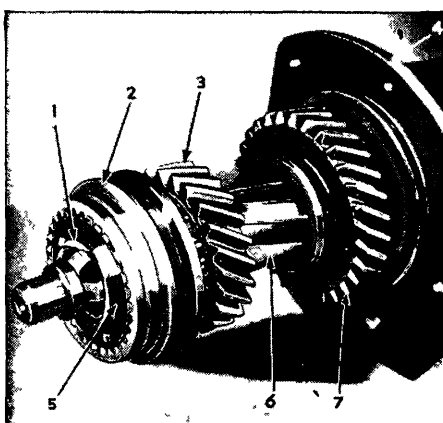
Mainshaft and extension on 1940-52 standard transmission. 1. Snap ring. 2. Clutch sleeve. 3. Second speed gear. 4. Extension. 5. Clutch gear. 6. Mainshaft. 7. Sliding gear
